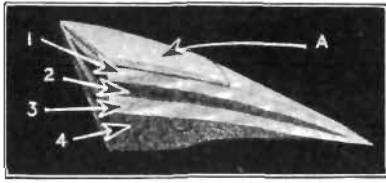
Soft-centered steel share point (landside toward figures): A, patch of hard steel for reinforcement. 1 and 3, hard steel; 2, soft steel; 4, steel landside, lap weld.
